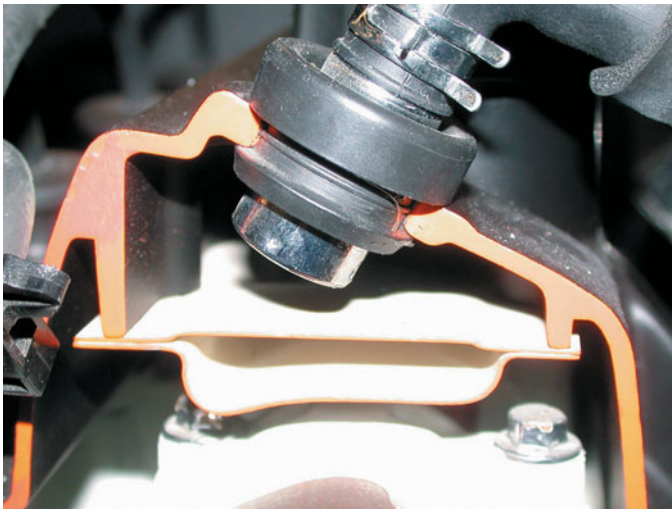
A PCV valve in a cutaway valve cover, showing the baffles that prevent liquid oil from being drawn into the intake manifold.
